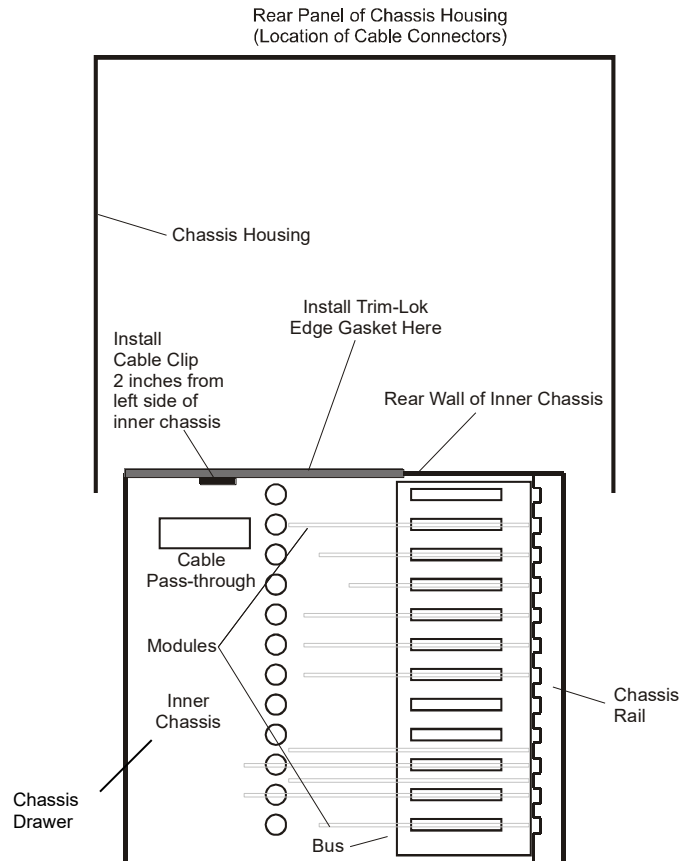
Overhead view of electronics chassis showing chassis drawer rolled completely forward, out from the chassis housing
